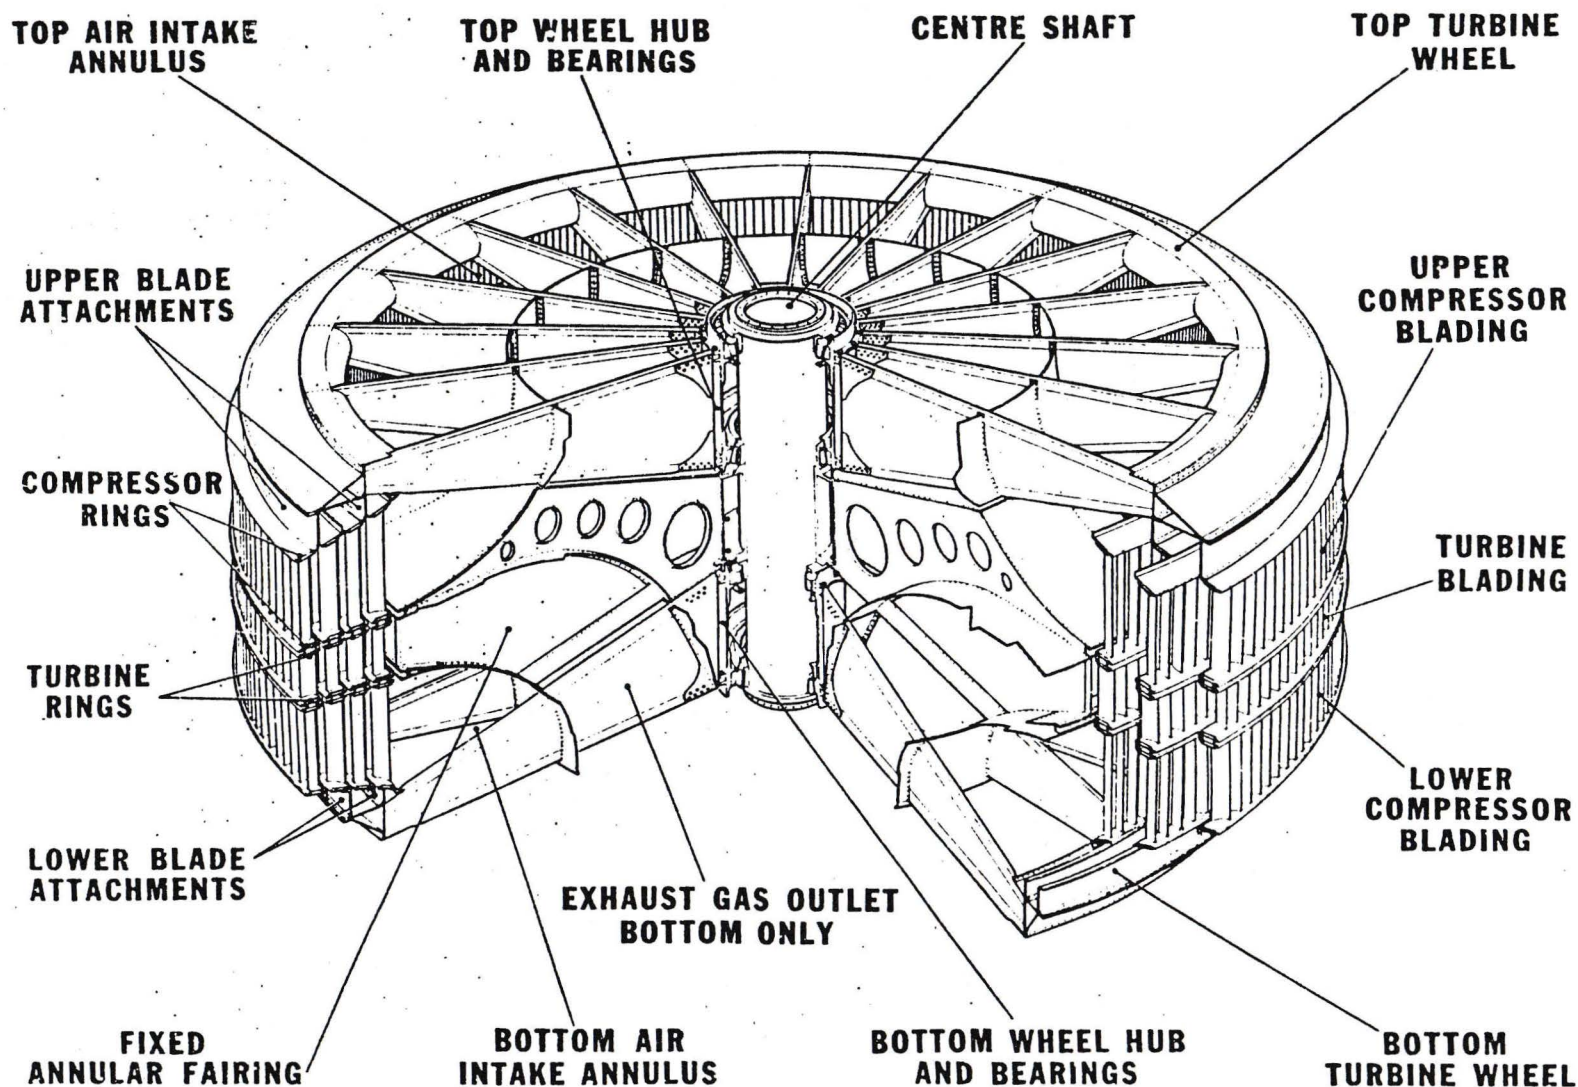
TURBINE-COMPRESSOR ASSEMBLY
